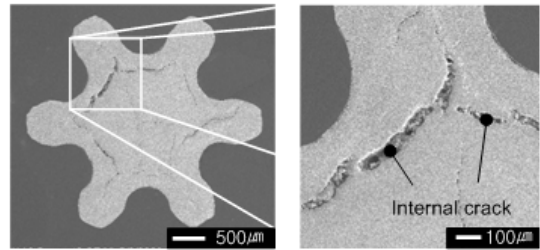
Internal crack of the spur gear after sintering in Process I
